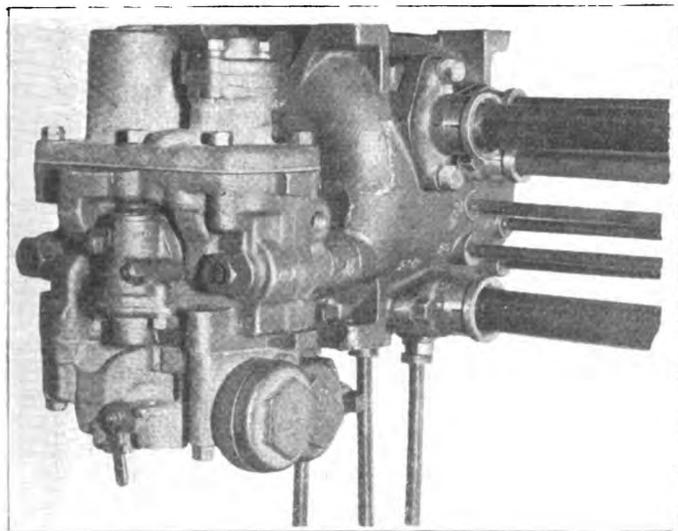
Valve Group C, With Cut-Out Lever to Lower Left Corner
